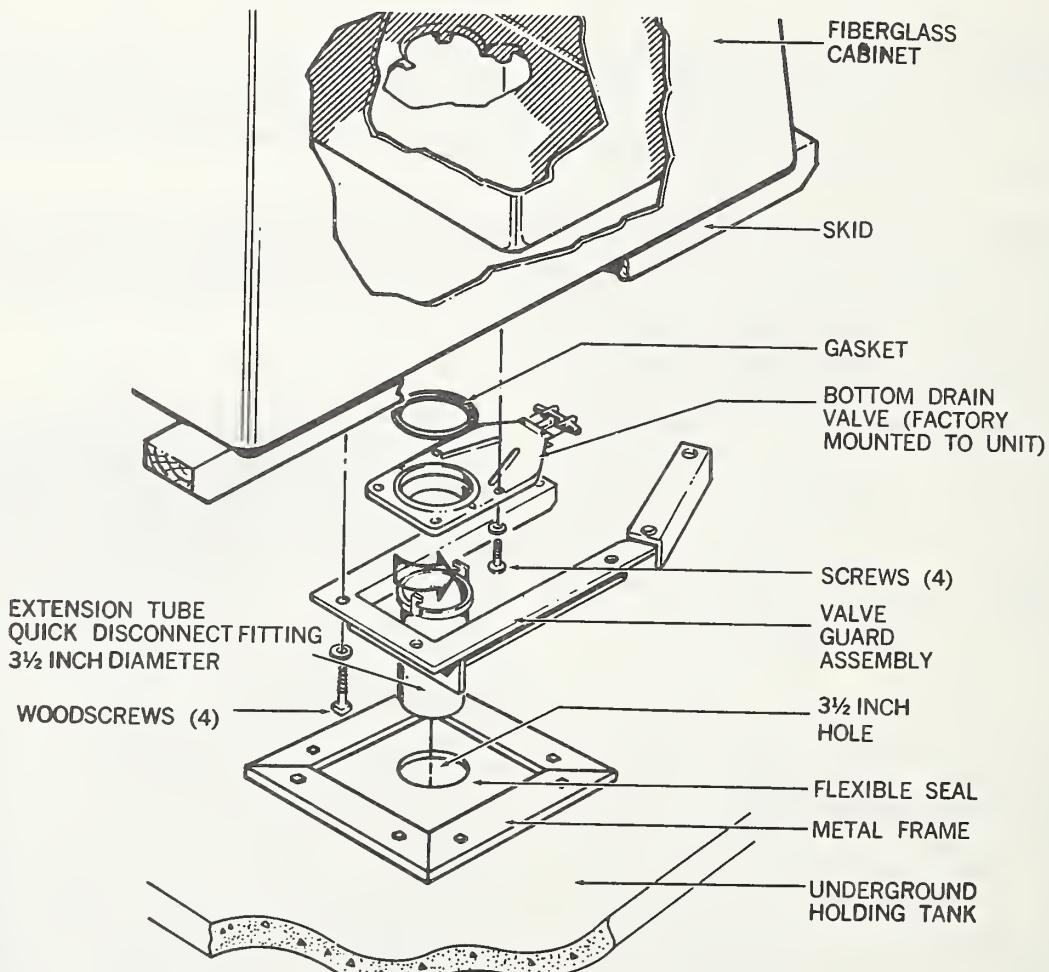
Drain valve extension fitting or 1000FE vault adapter.
